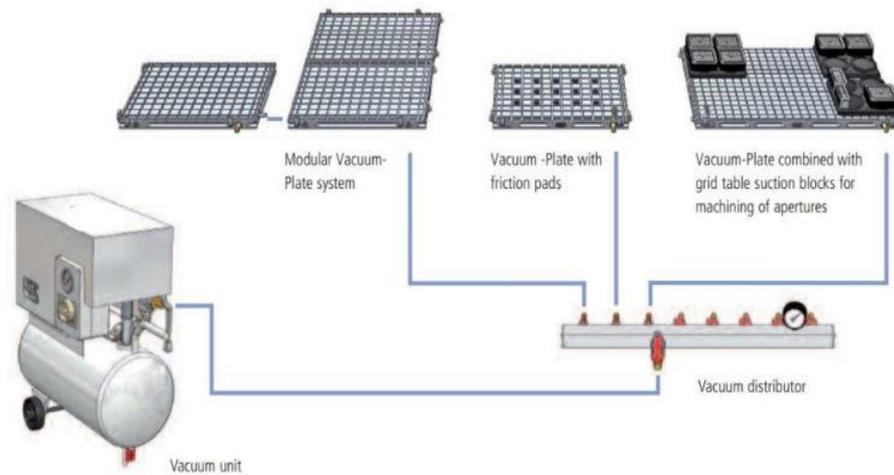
Flexible layout of a complete vacuum clamping system (Spreitzer, n.d.)
